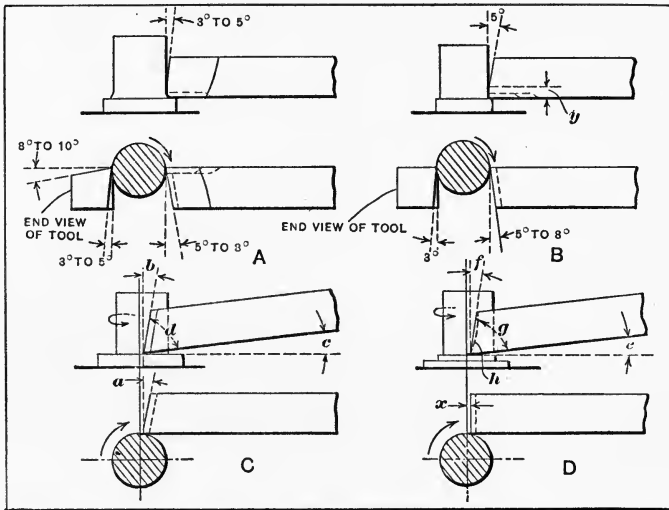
Different Methods of Applying Box-tool Cutters in Automatic Screw Machine Practice
